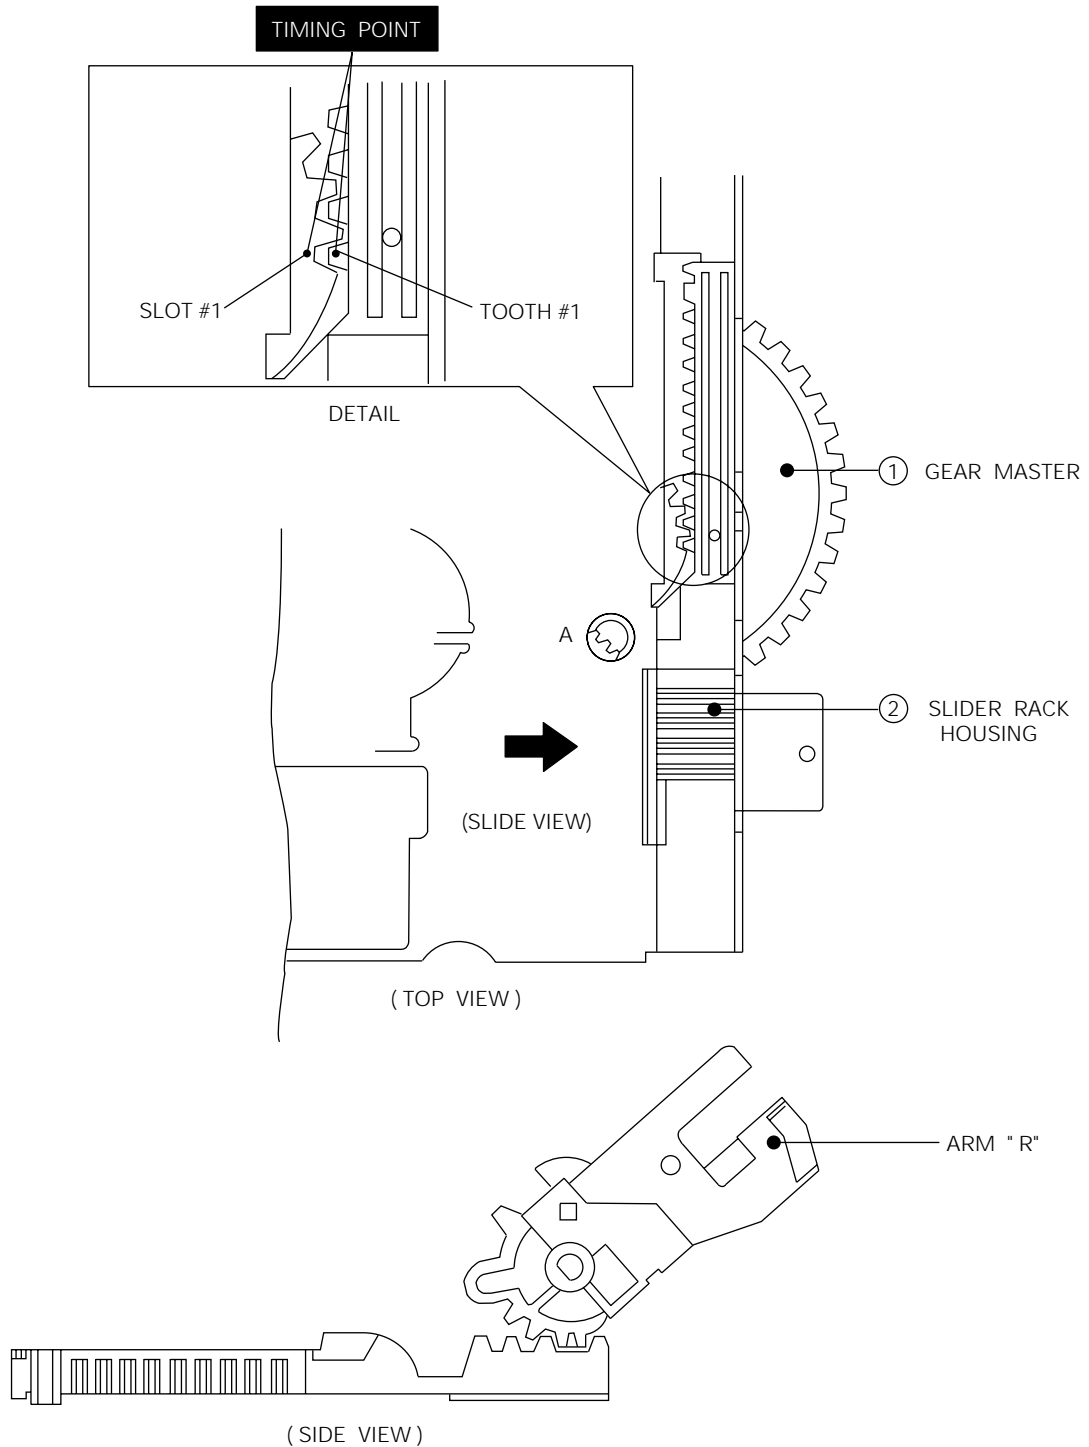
Assembly of Slide Rack Housing and Gear Master
